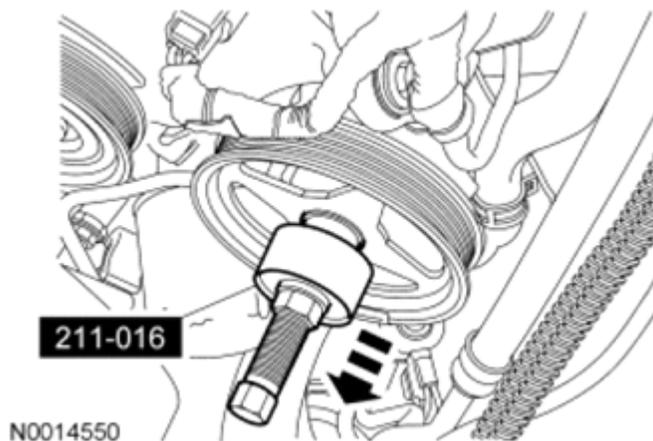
Removing Power Steering Pump Pulley Using Special Tool
